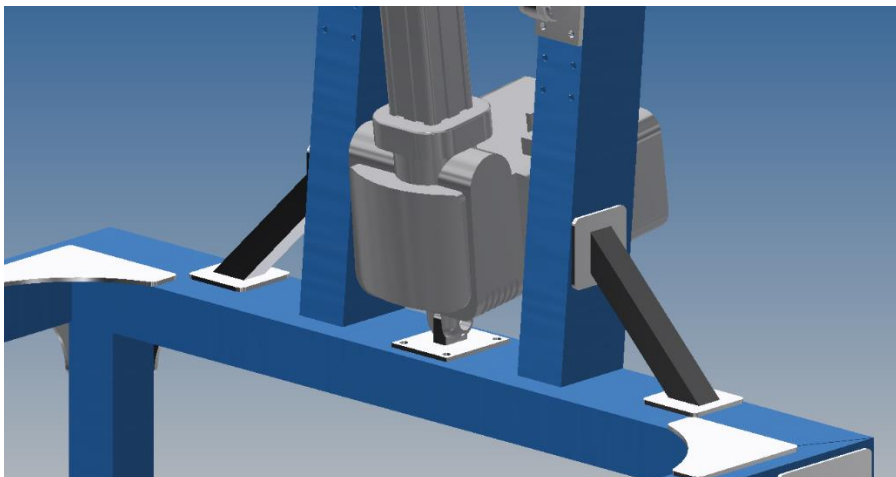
Reinforcements for upright bars. (Note that the end plates were later on removed).
